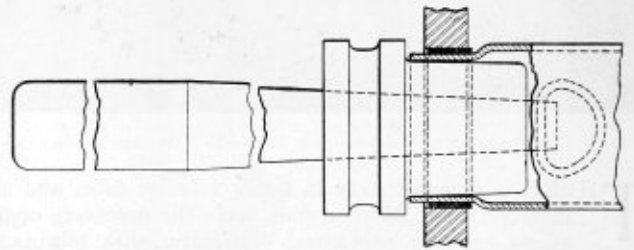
Method of Tightening Tube in Back Tube Sheet
